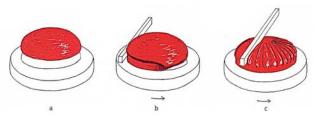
Rotary-pressing technique for a ribbed bowl (a) Heated mass of glass slumped on former mold placed on a potter's wheel; shaping (b) and decorating (c) vessel while slowly rotating.
